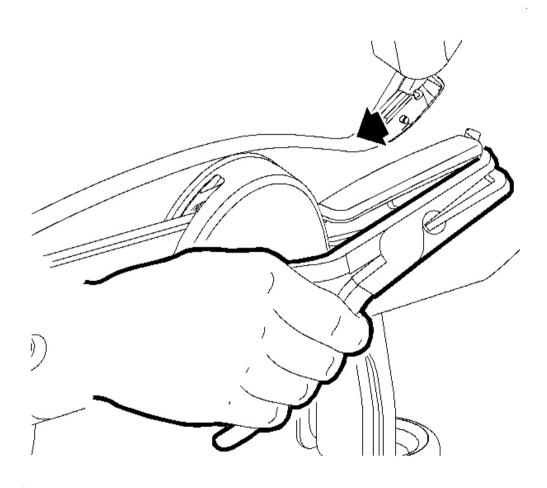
Recliner Handle Trim & Side Trim Cover Courtesy of GENERAL MOTORS CORP.
